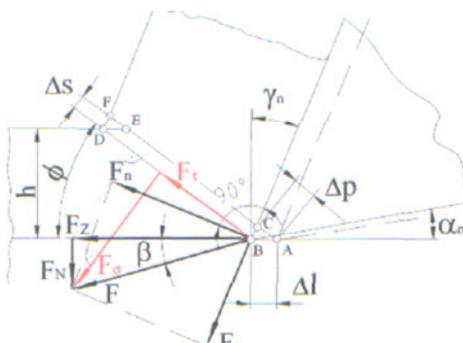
The model of the forces pattern in the machining zone for the model of Creating a chip with one plane of shear.
